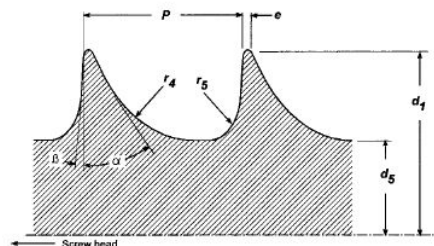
Schematic of HB Screw Thread Dimensions (Table A5.4)
